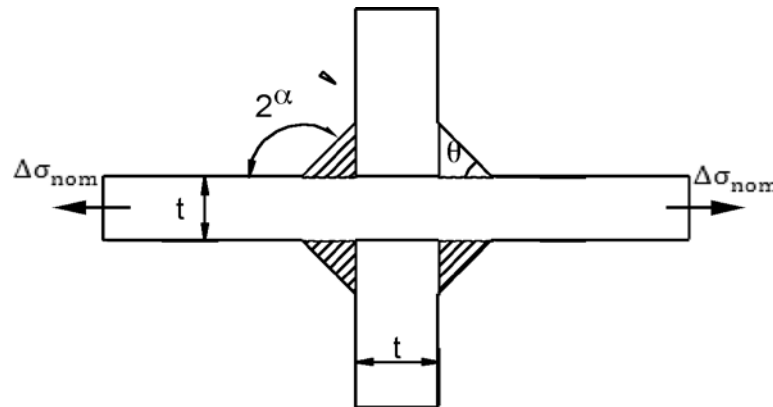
Definition of specimen and toe geometry for a fillet weld
